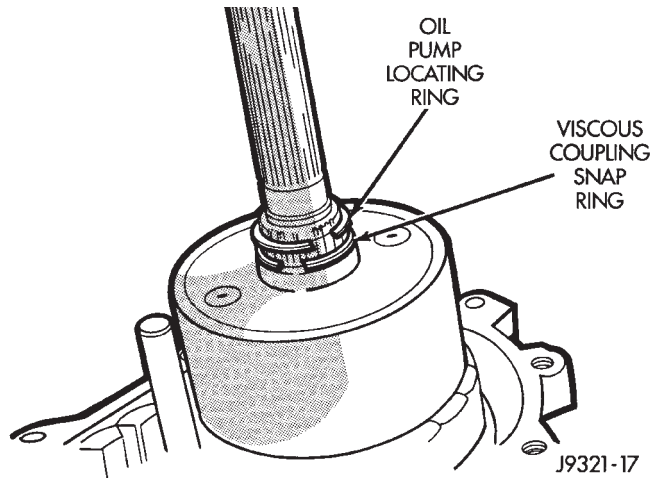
Viscous Coupling And Oil Pump Ring Installation
